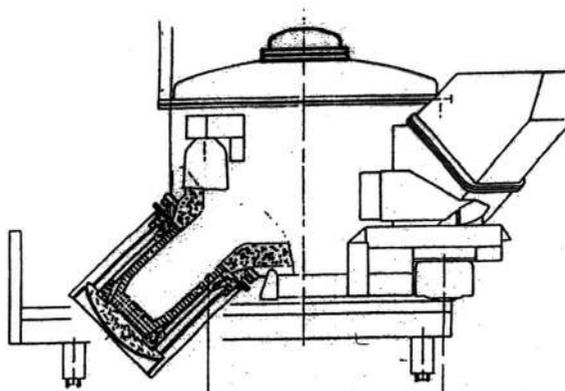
Tilting ladle system with the PRESSPOUR® casting furnace
